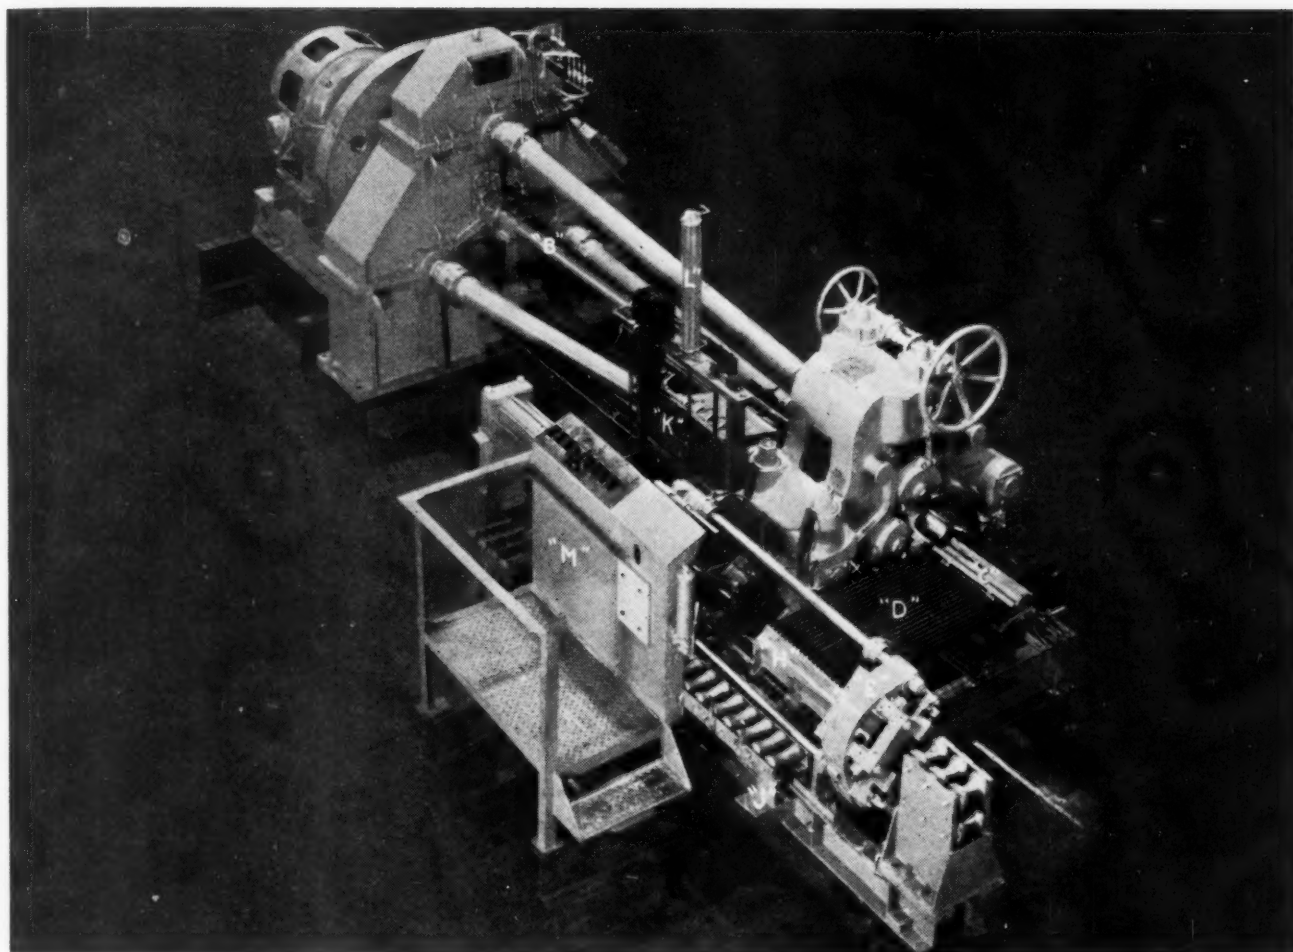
ASSEL CROSS-ROLL ELONGATOR MILL
